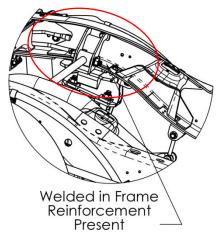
Frame with internal frame reinforcement. Do not add 10993-002.
